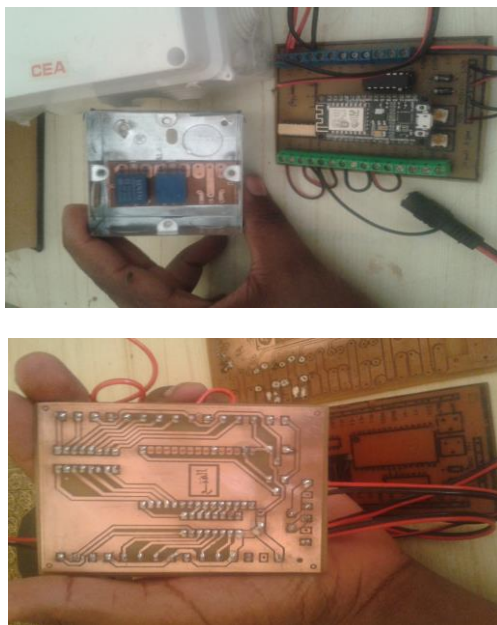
(Left) The PCB design of the system for the central unit board. (Right) The distributed relay boards
